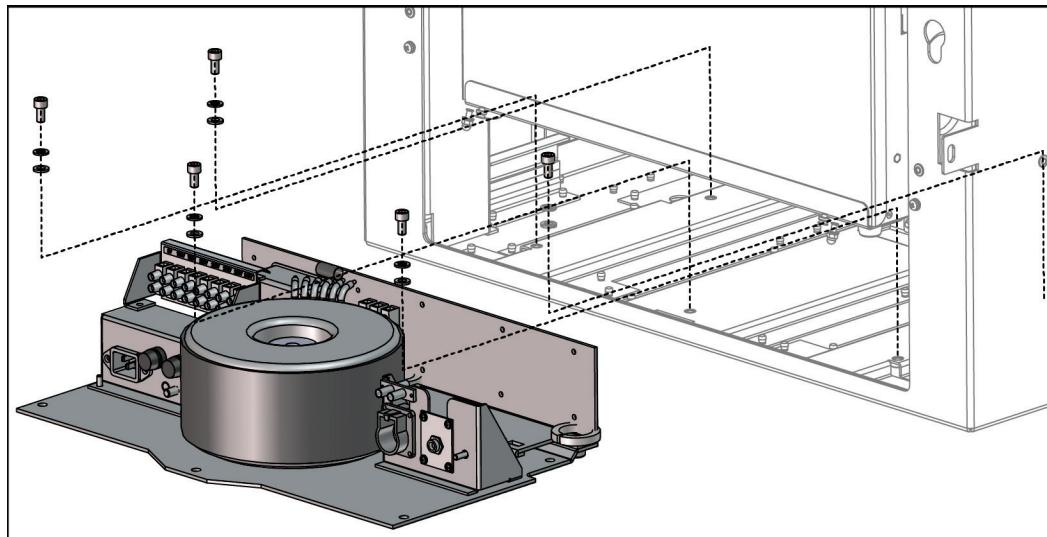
Unfastening mounting bolts and sliding power distribution assembly out of rear of chassis
